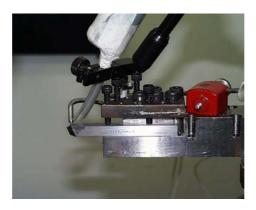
Cutting Tool with fluid aspersion and chip withdrawal systems
